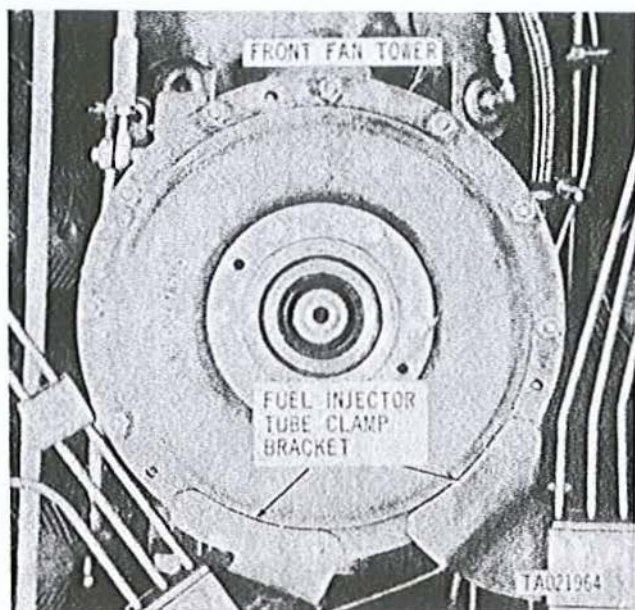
Front fan tower fuel injection tube clamp bracket location.
